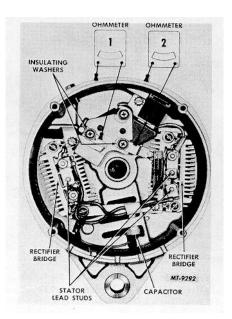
End Frame View with Stator Removed (Two Rectifier Bridge Type)
